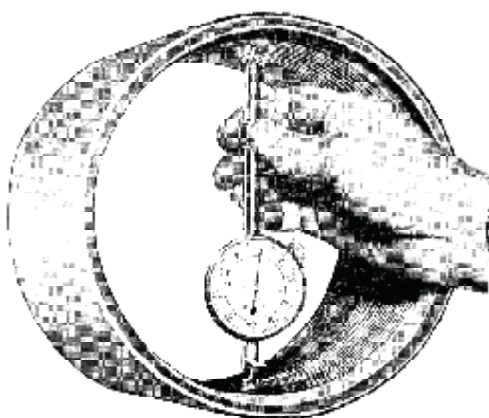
Typical Internal-Thread Taper Gauge for Threads in Sizes 4¹/₂ and Larger
